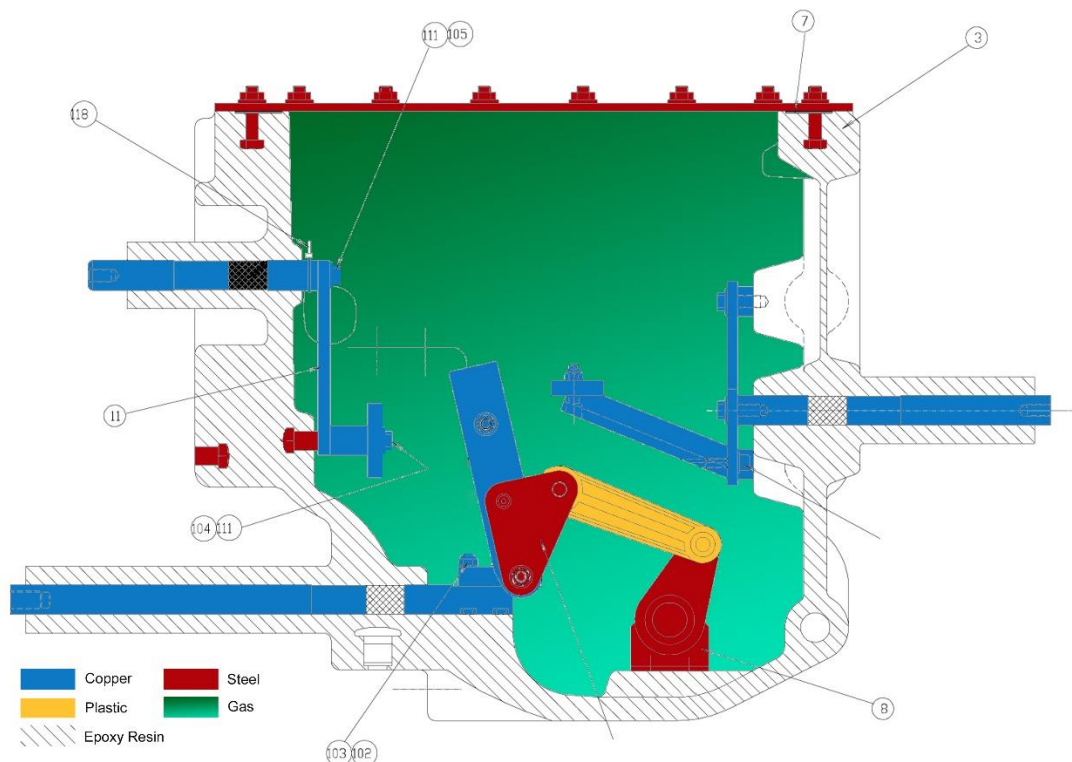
Materials used to manufacture the Ringmaster switch disconnector [82].
